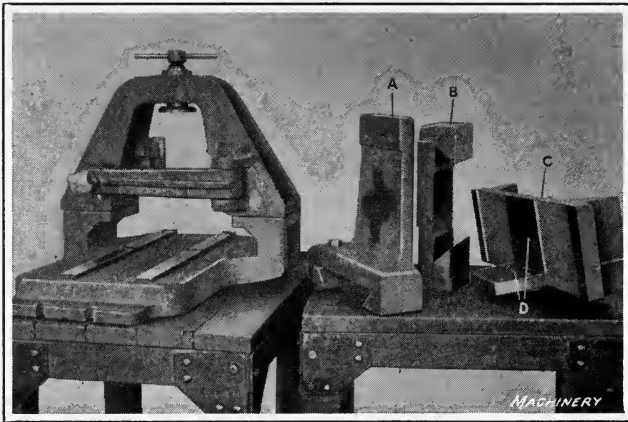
Fixture used in Milling Operation on Case, and Parts for supporting Auxiliary Cutter-head
